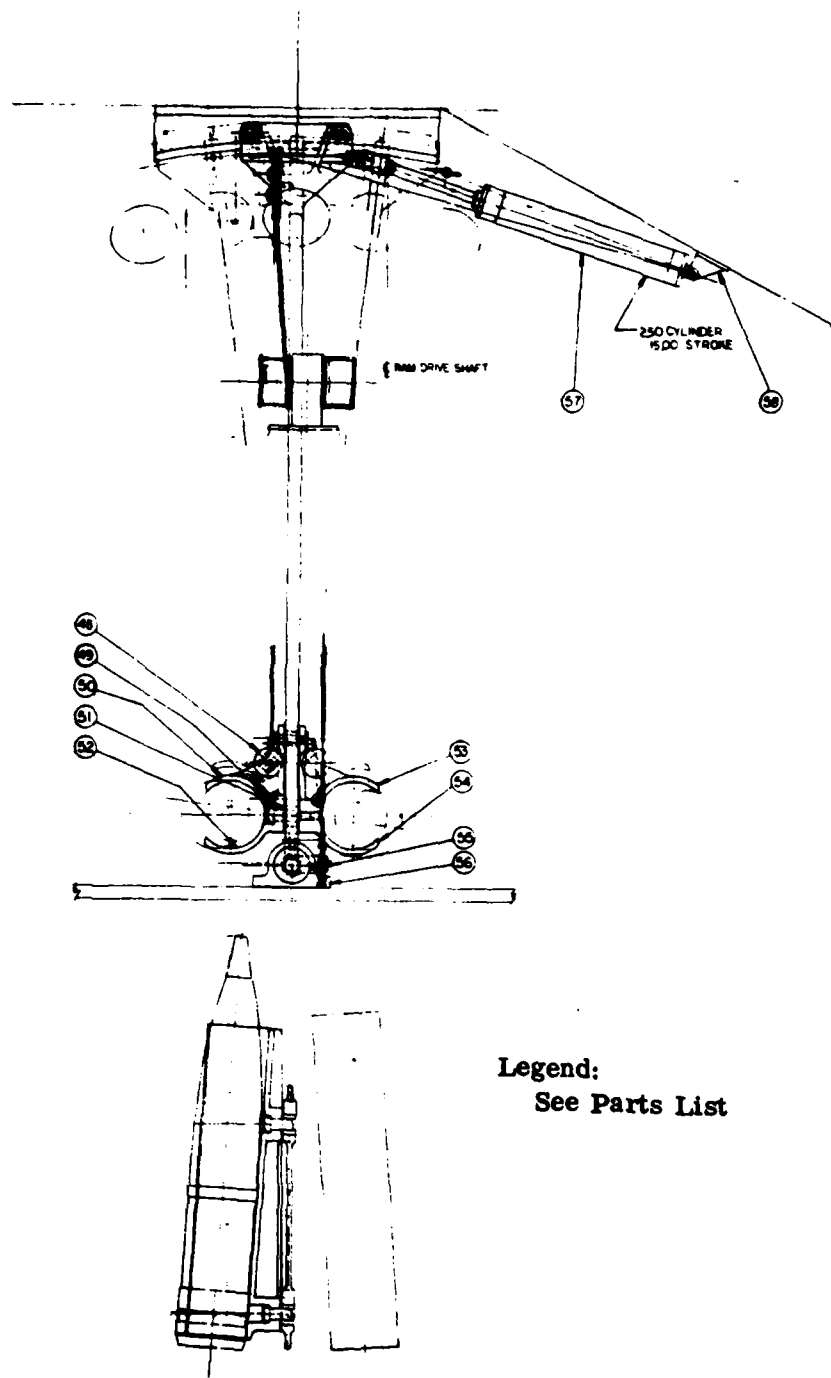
10. Guide Ramp Conveyor - Elevating Conveyor
